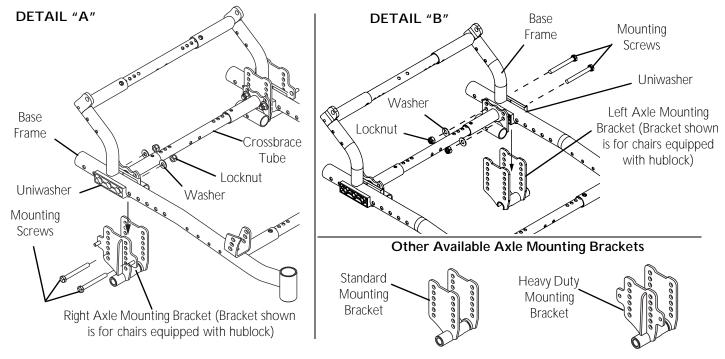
Removing/Installing the Axle Mounting Bracket
